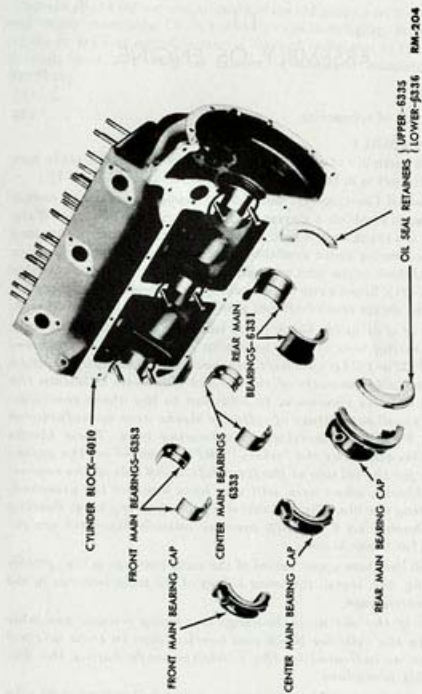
Cylinder Block, Main Bearings and Caps, and Oil Seal Retainers, Disassembled
